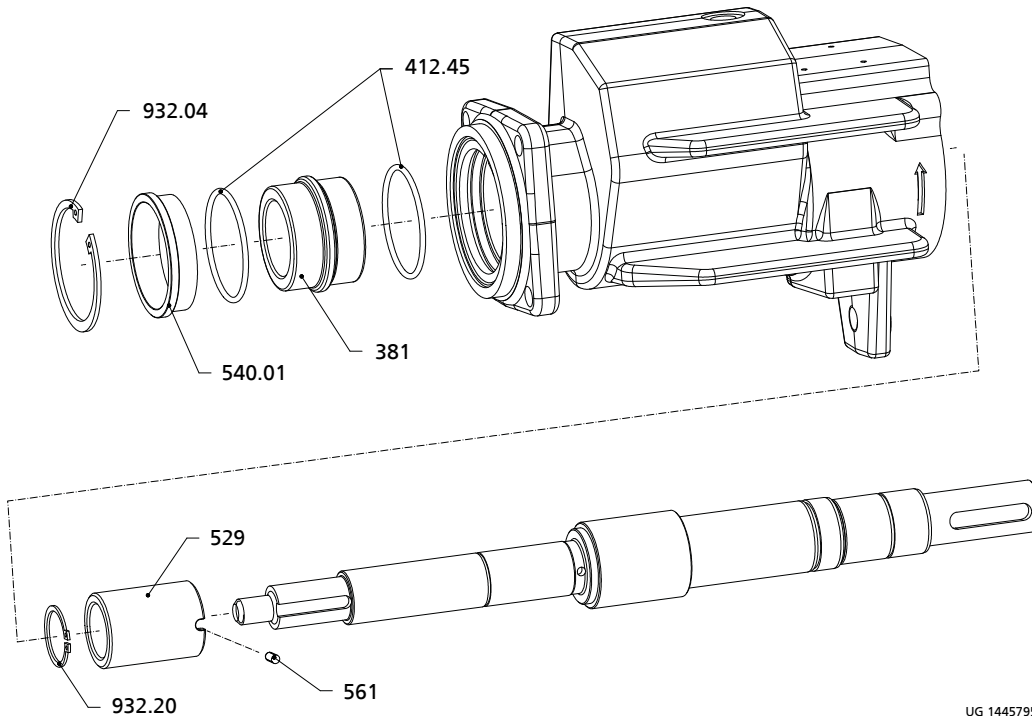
Exploded view of an Etanorm SYT, bearing brackets WS\_35\_LS / WS\_55\_LS with double mechanical seal
